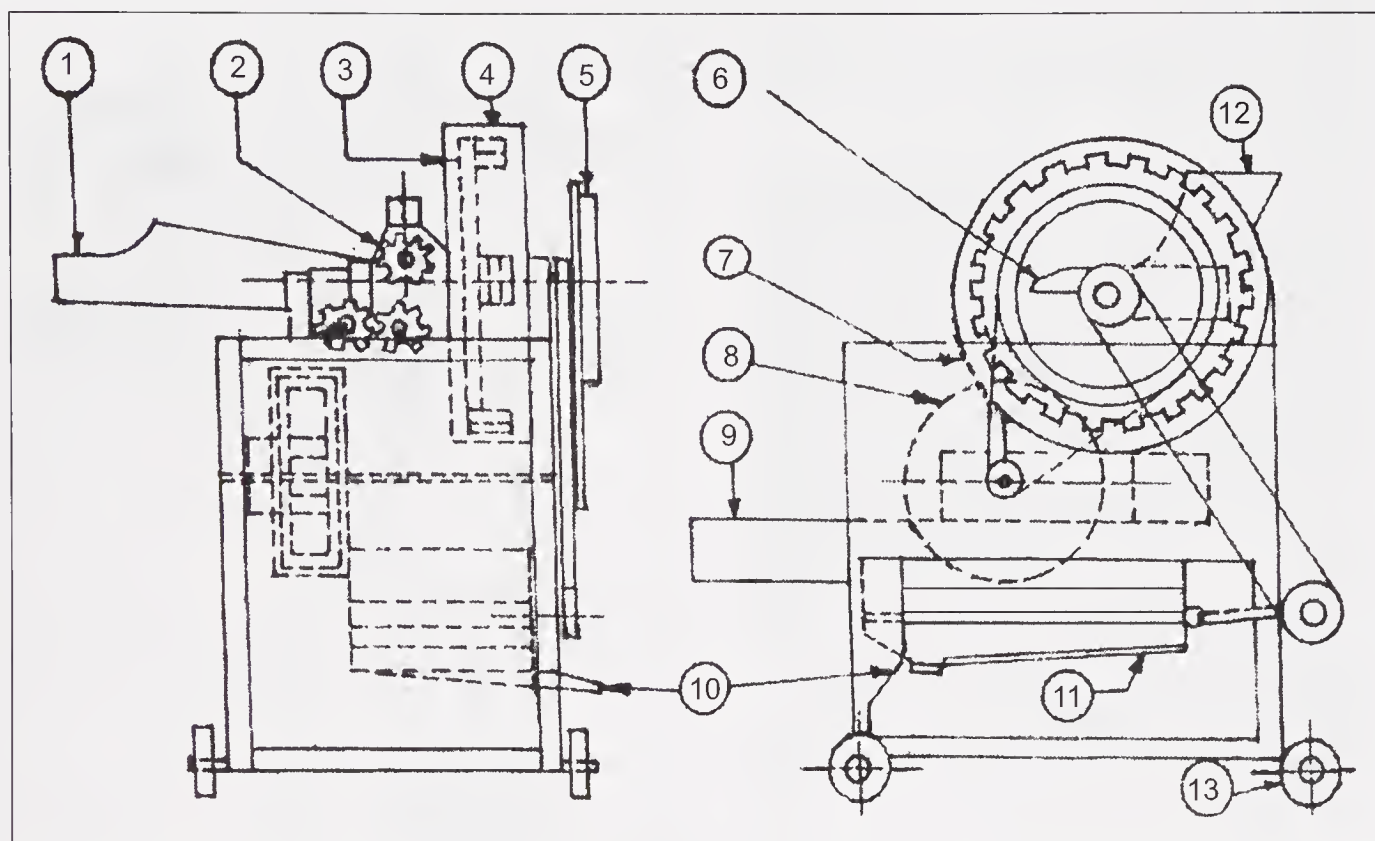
Schematic diagram of chaff cutter type wheat thresher. 1, Feeding chute; 2, Feed rollers; 3, Knife wheel; 4, Beaters; 5, Flywheel; 6, Knife; 7, Concave; 8, Blower; 9, Straw outlet; 10, Grain outlet; 11, Oscillating sieves; 12, Tailing hopper and 13, Transport wheels.
